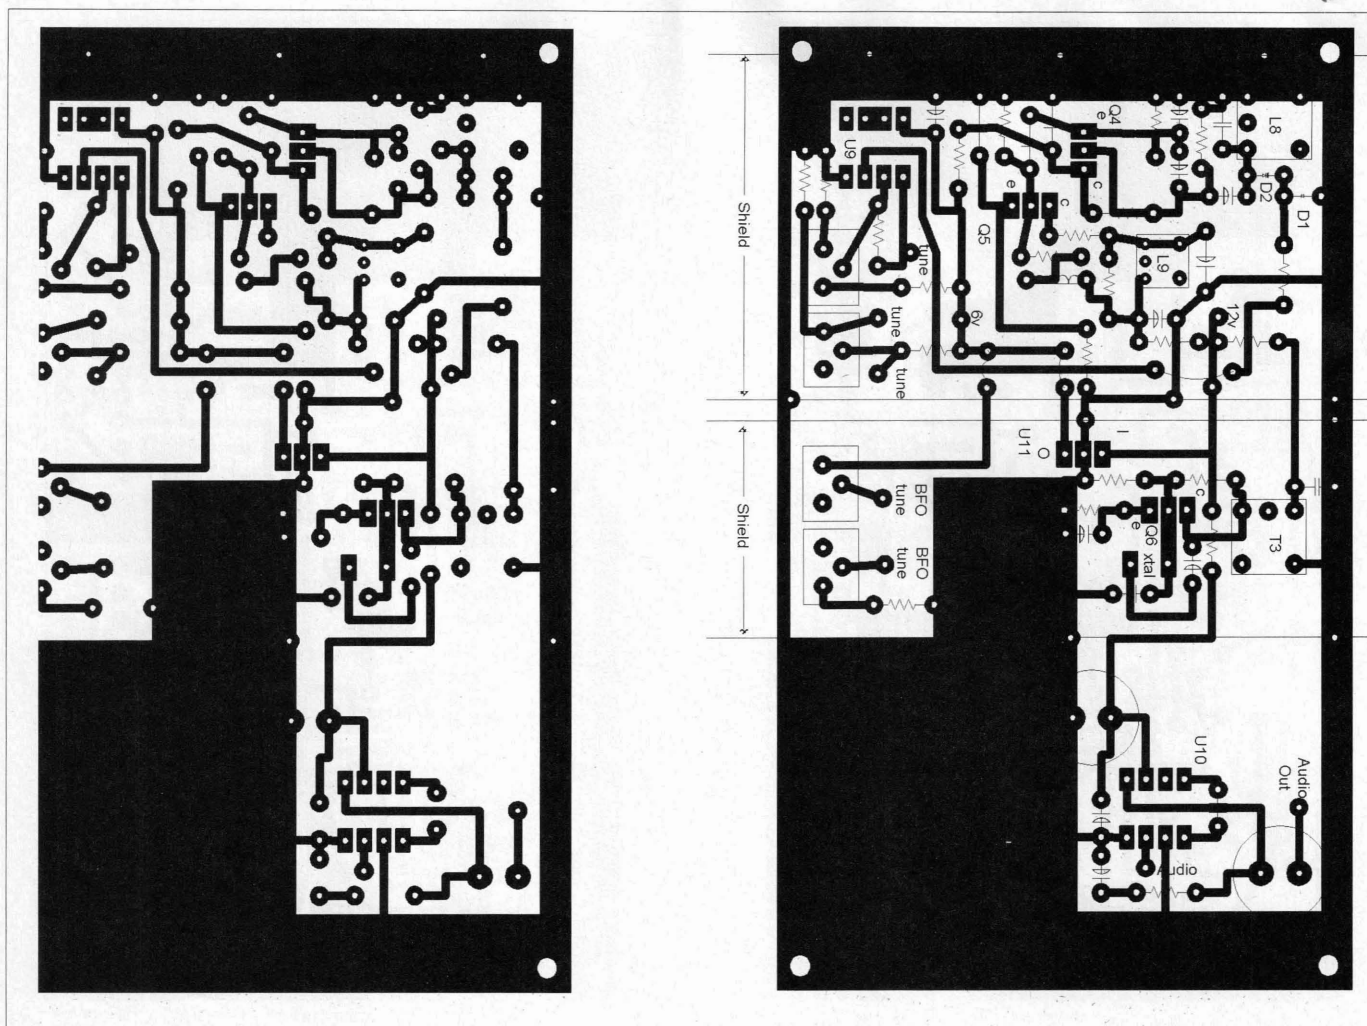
(a) Oscillator board. (b) Parts layout from foil side.
